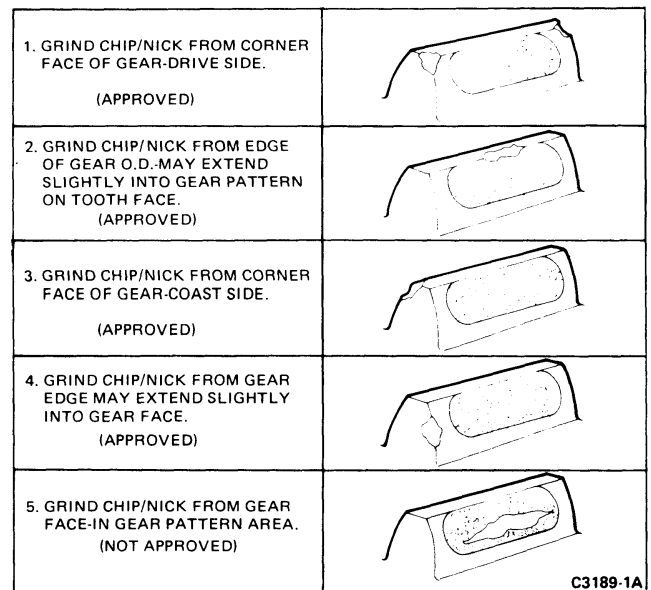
Approved Four-Speed Transmission Gear Tooth Chip/Nick Removal Procedure—F-100—F-350, Bronco
